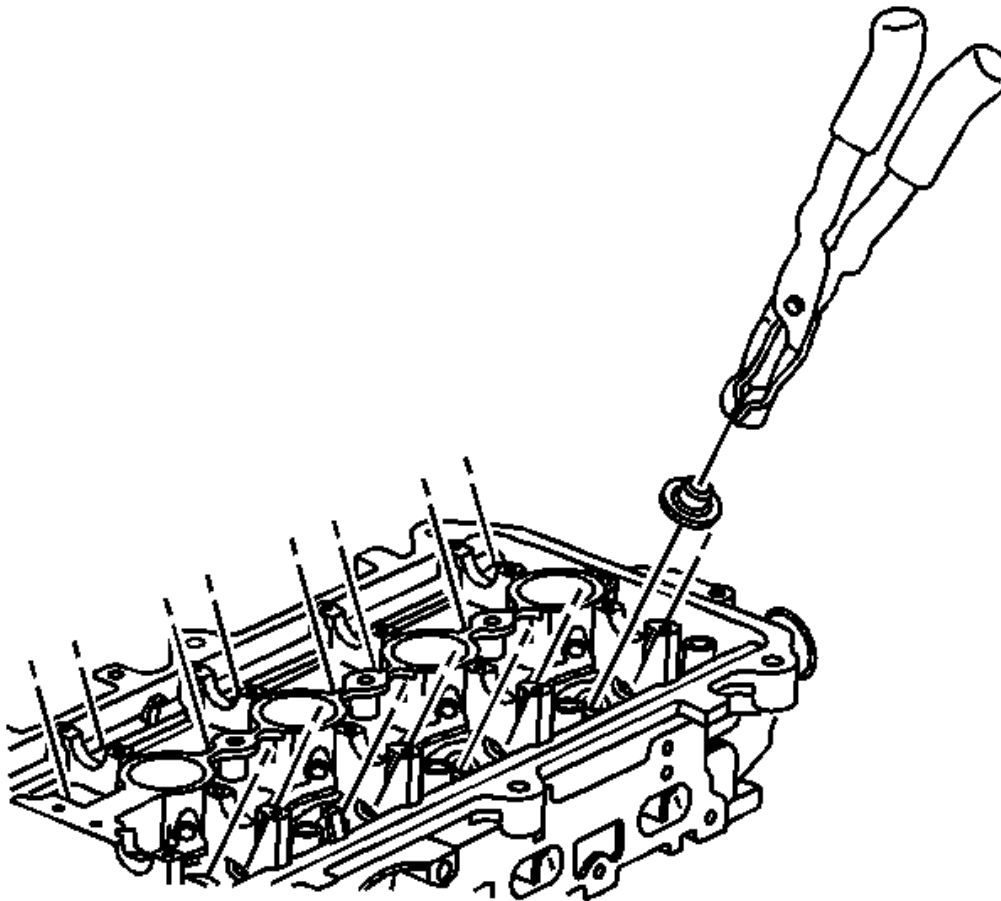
View Of Special Tool J 36017 & Valve Seal
